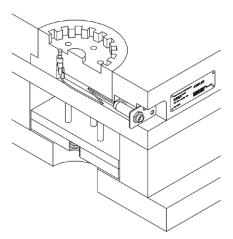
Sensor, cable, connector, mounting plate (Mat. No. 65005208) and identification label (Mat. No. 18031414)
